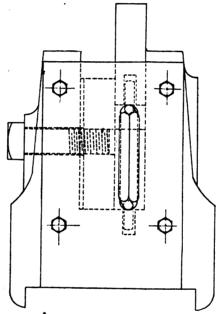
THE ASSEMBLED SHEAR. SIDE VIEW OF UPPER SKETCH IN FIG. 2.
